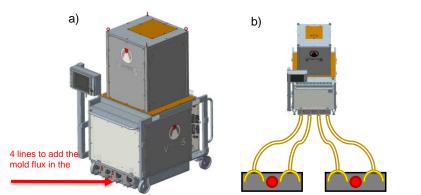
a) Equipment with 4 lines to add the mold flux into the mold. b) Details of the lines adding mold fluxes into two strands in the continuous casting machine
